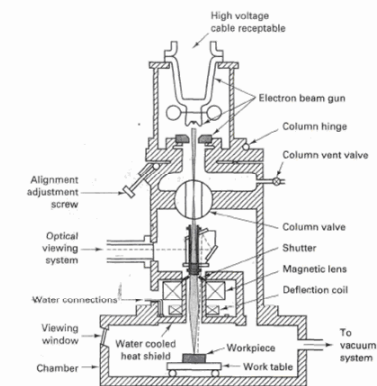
FIGURE Schematic diagram of the electron beam welding process. (Courtesy of American Machinist.)
